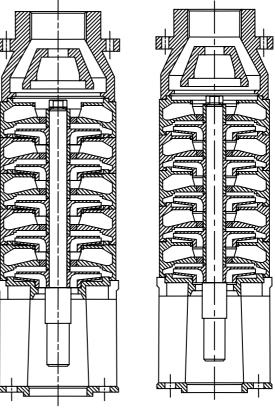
Pump subassembly Fig. 6 Pump subassembly in assembled condition
